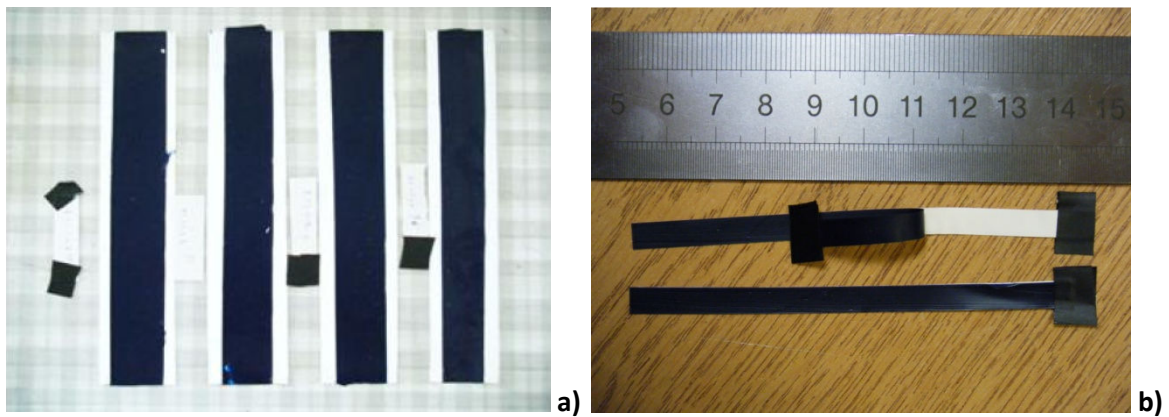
, a) finished strip of T-peel sample before cutting, b) finished T-peel test sample after cutting
